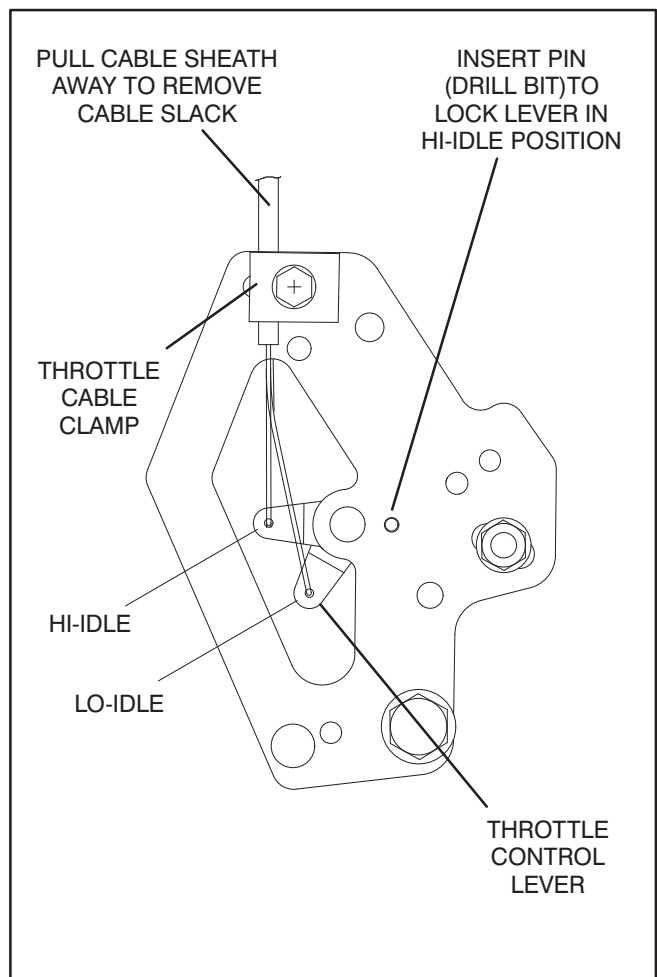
THROTTLE CABLE ADJUSTMENT AT SPEED CONTROL PLATE
